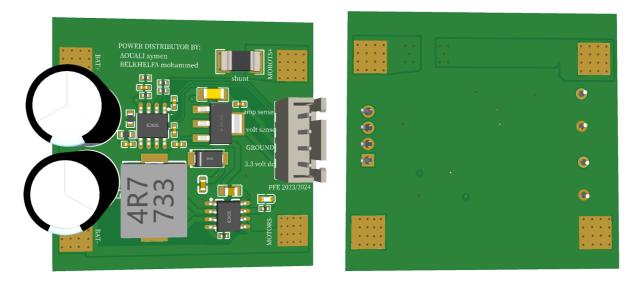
3D Pcb Power distribution Top And Bottom View
